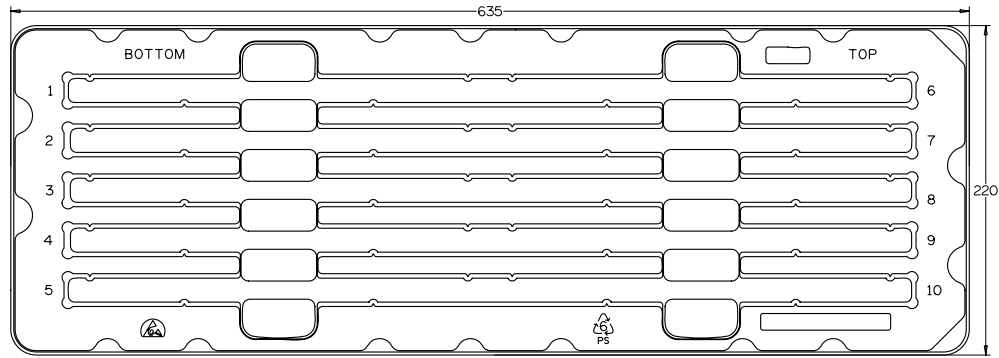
Tray dimensions for L218-xxxx0ccCx0000.
